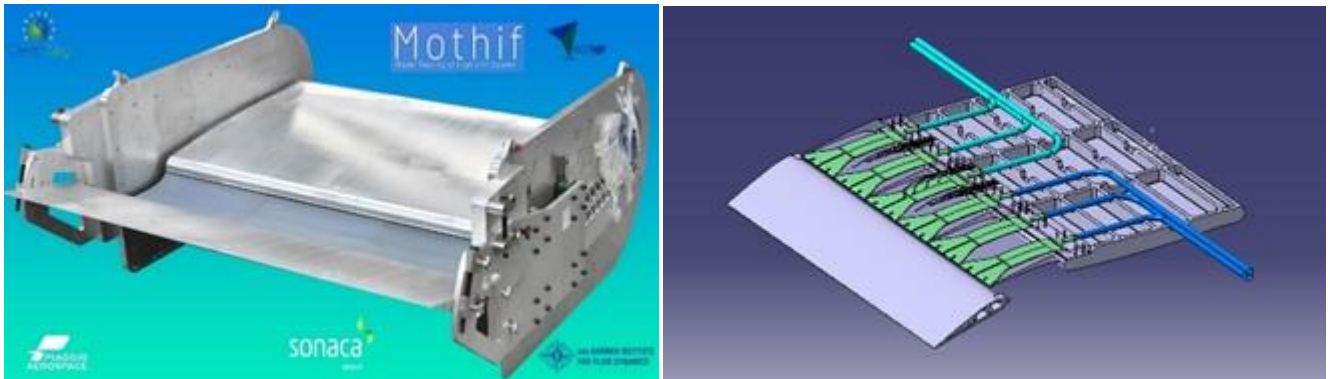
WT specimen manufactured model (left) and CAD geometry (right)
